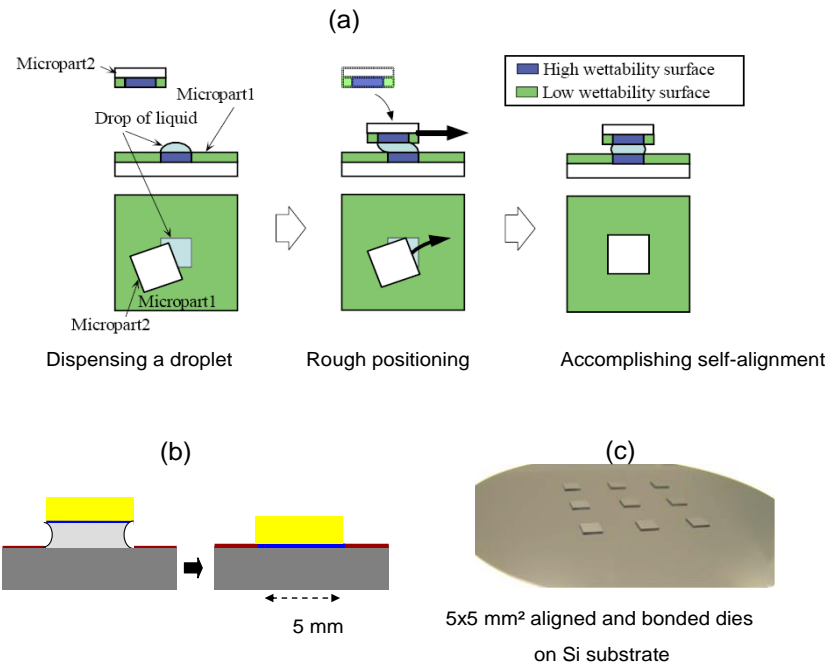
Principle of die self-alignment: (a) sketch of the droplet and the die; (b) sketch of the die before and after evaporation; (c) view of aligned dies on a wafer [9].
